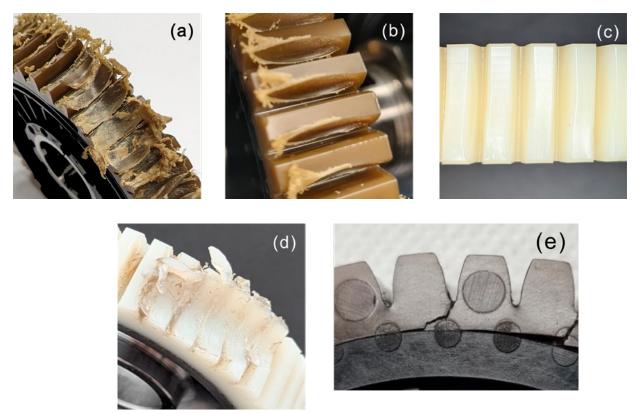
Examples of various failure and damage modes exhibited on polymer worm wheels- a) thermal overload, b) wear, c) tooth deformation, d) tooth fatigue fracture and e) root fatigue fracture.
